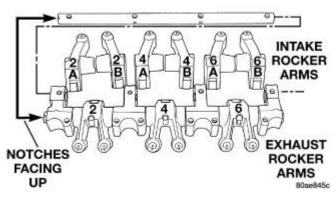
Rocker Arms and Shafts Courtesy of CHRYSLER LLC
